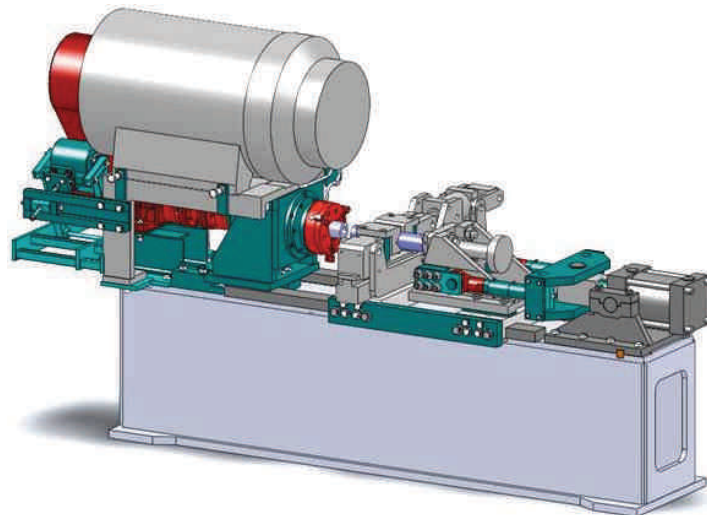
Redesign of the rotary friction welding machine (2)
